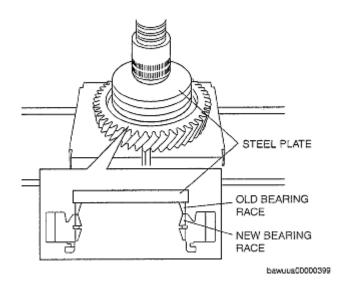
Installing Bearing Race Inner To Counter Drive Gear Courtesy of MAZDA MOTORS CORP.
